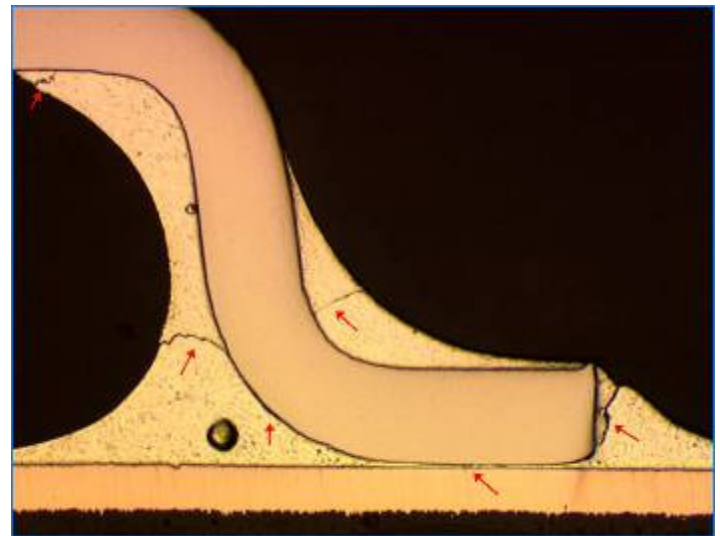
cross section, SN68, U29, right lead solder crack, 100x
